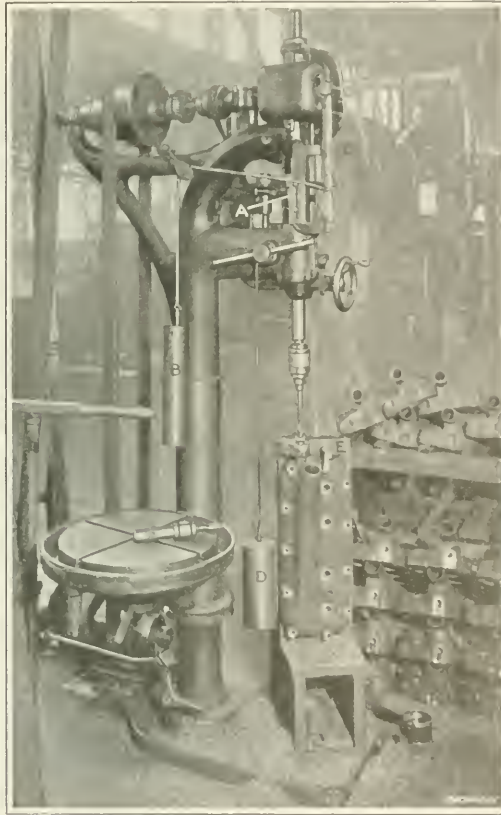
Reed-Prentice 21-inch Drill Press tooling up for drilling and tapping Hole in Fan Stud Boss on Cylinder Heads—Note Special Roversing Mechanism for backing out Tap, and Wield Quick-change Chuck
